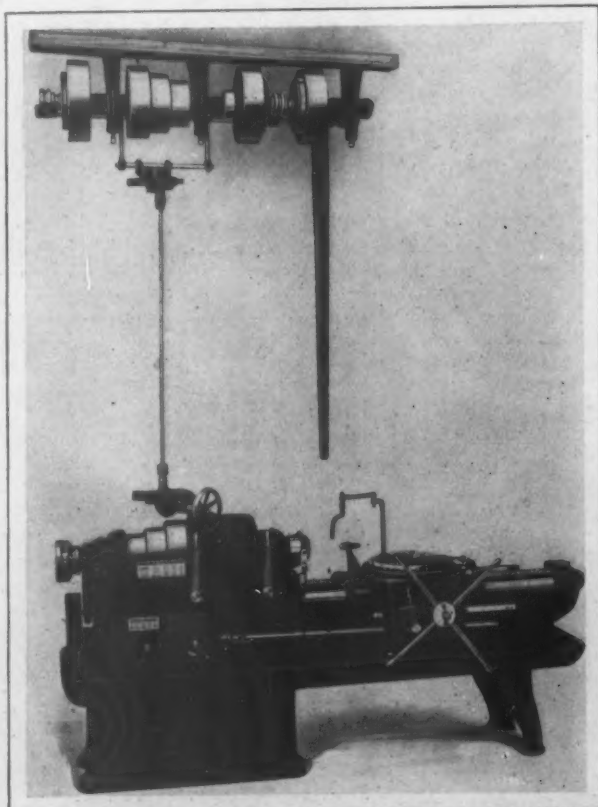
View of the Lathe Showing the Belt Shifting Device
